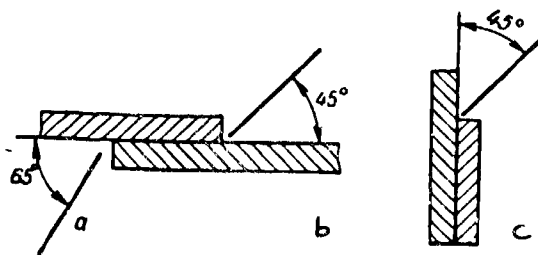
Position of Electrode During Welding (with a Fillet Seam) of Lap Joints in Various Spatial Positions: a - overhead; b - downhand; and c - horizontal.
